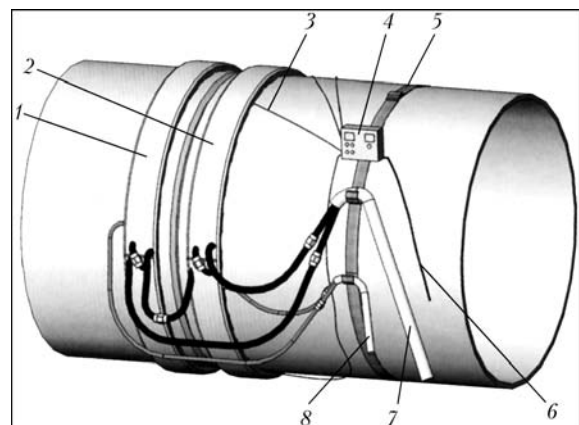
Scheme of arrangement of soft flexible induction coil on the pipe: 1, 2 – 1st and 2nd induction coils, respectively; 3 – connection of thermocouples (4 pcs); 4 – remote control panel; 5 – assembly belt from a set; 6 – control cable; 7 – electric cable; 8 – water hose
